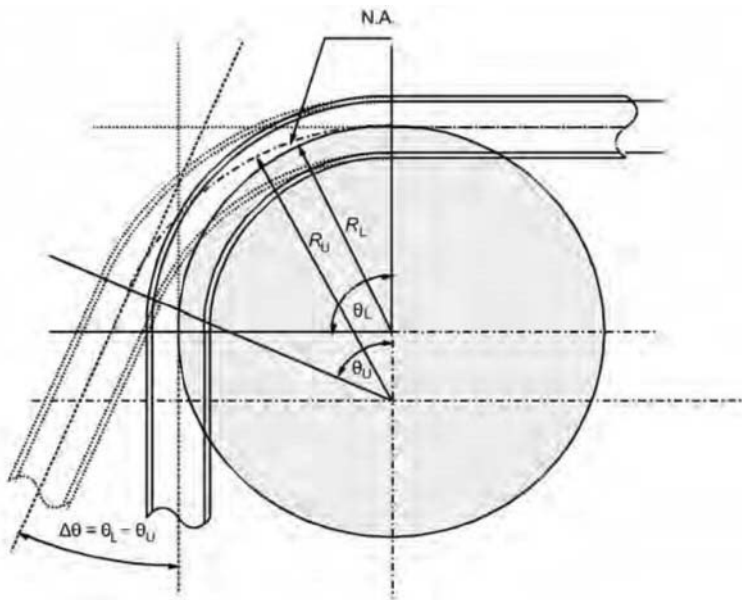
Typical tube bending operation; thickness distribution around and along the cross-section of the bent tube; springback
